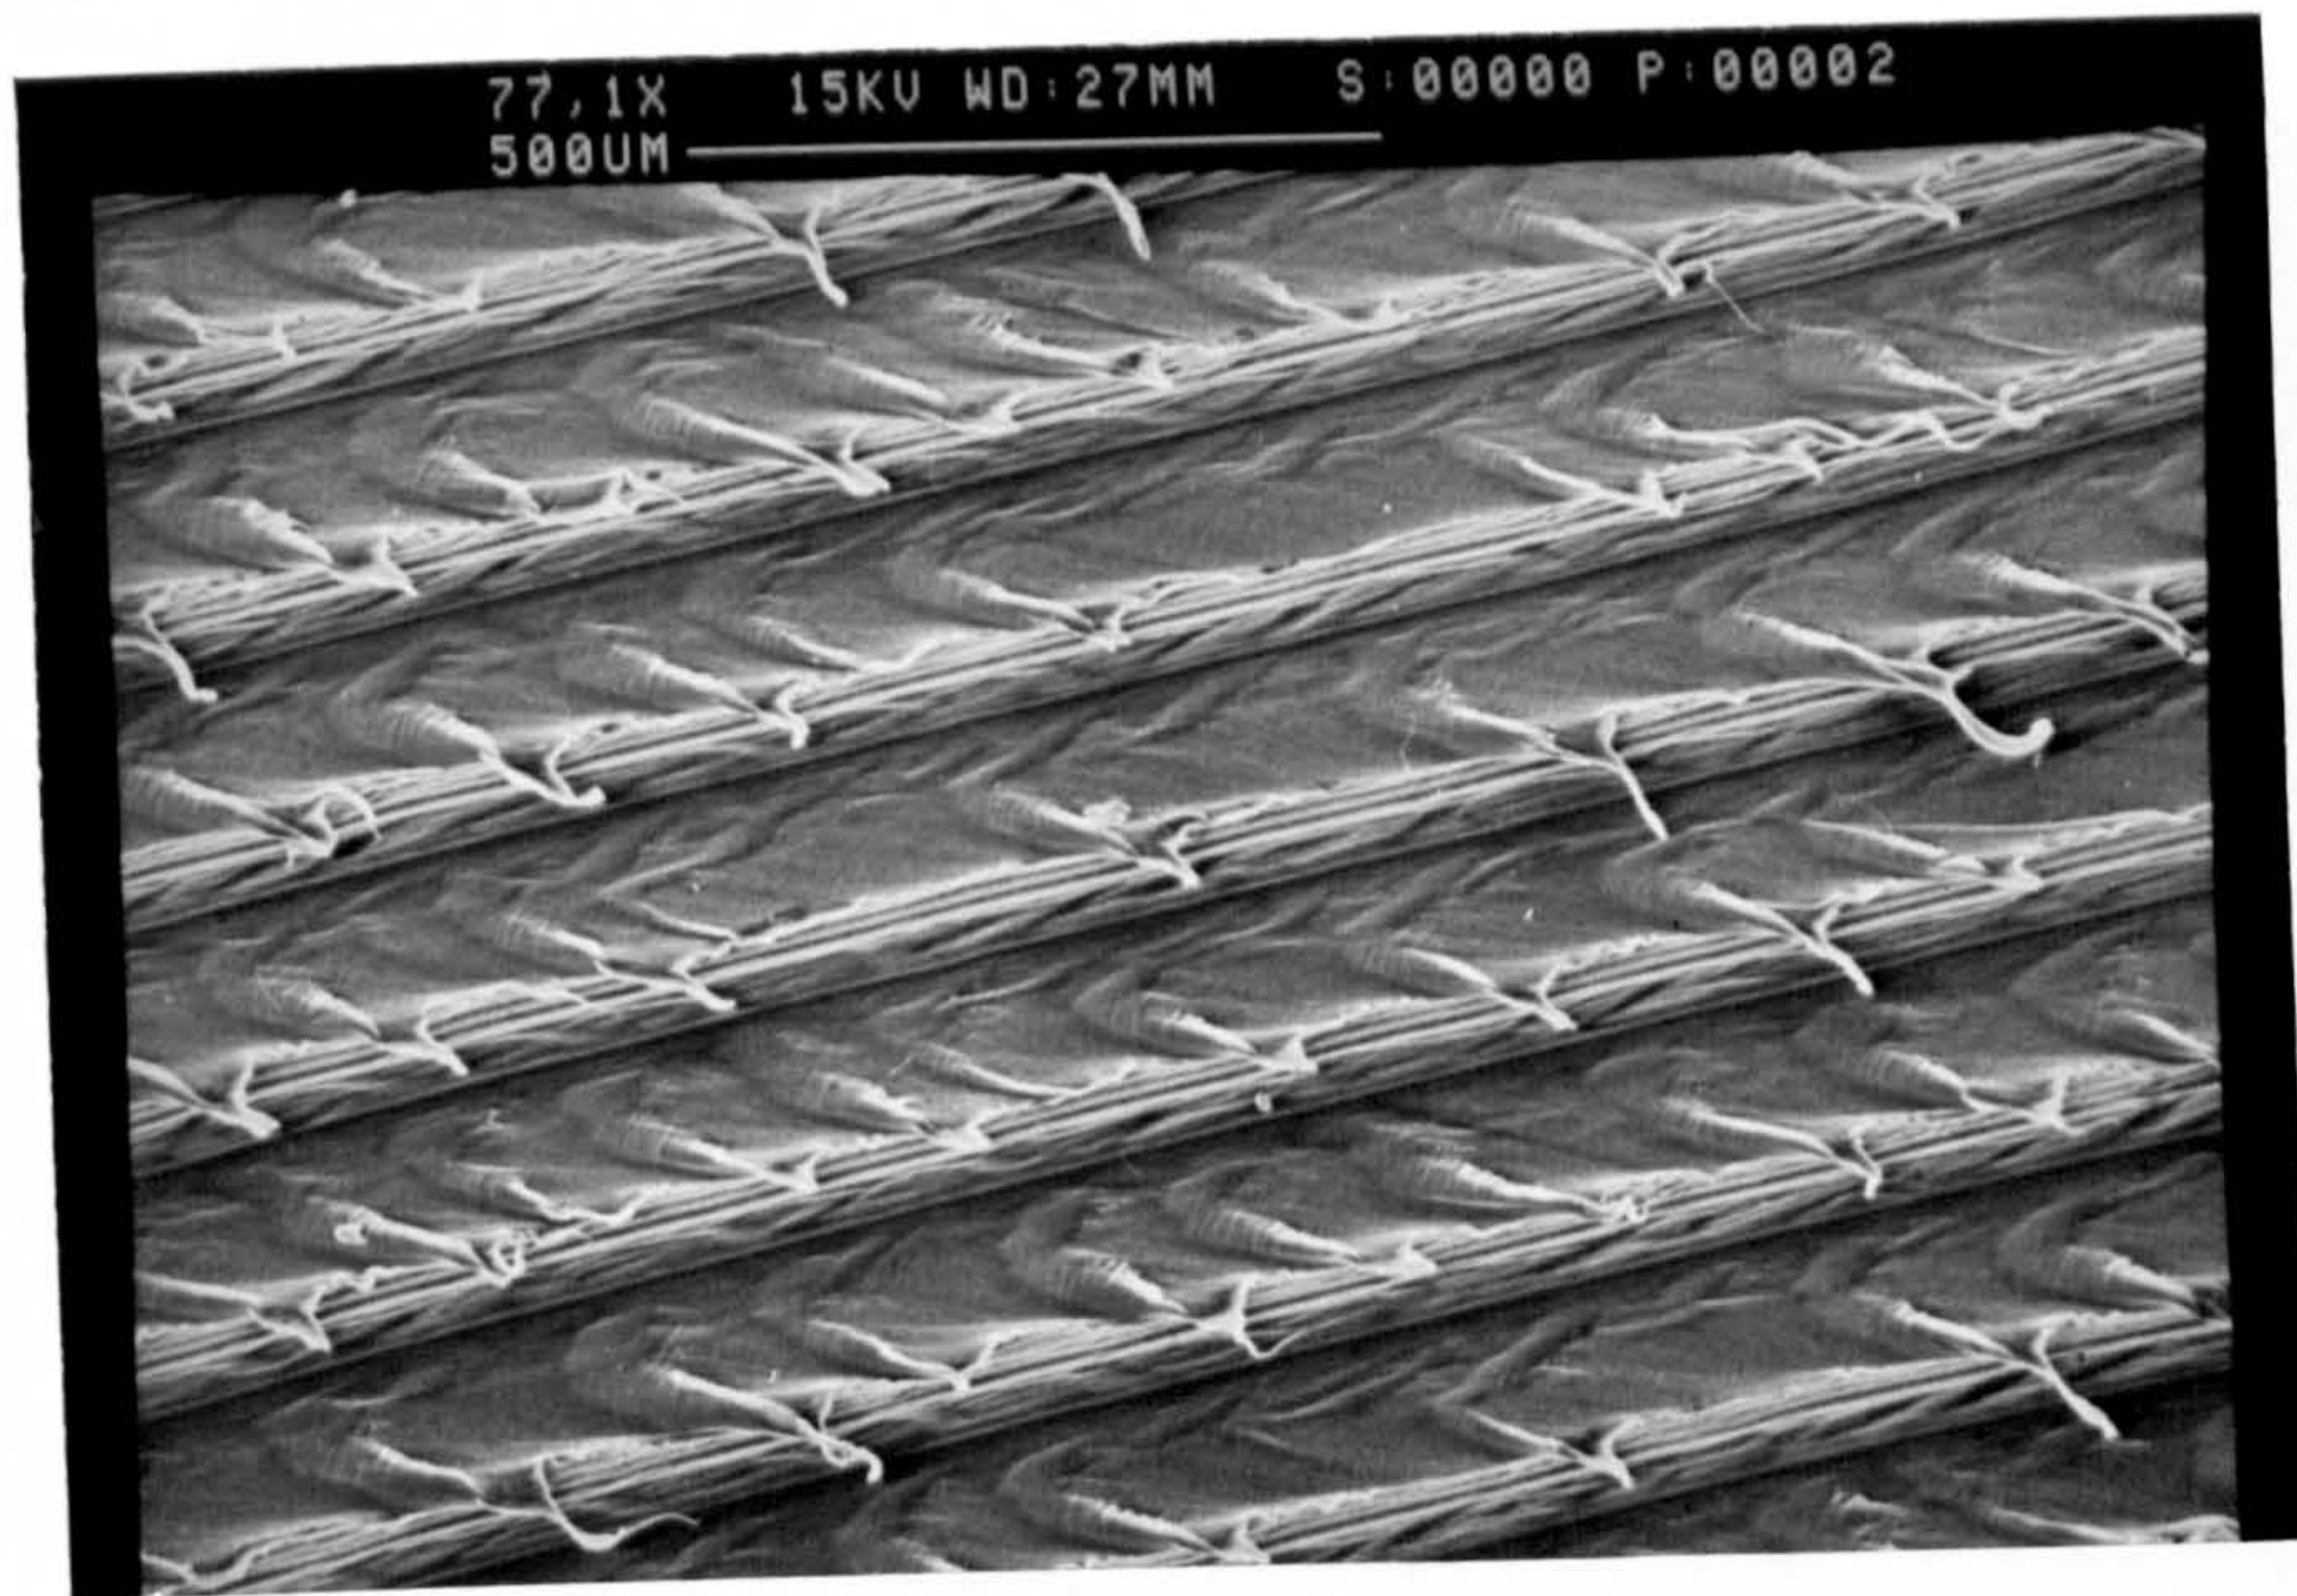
Machined HDPE surface showing the flow of viscous work material. (Rake angle =  $-20^{\circ}$ , speed = 25 m/min, feed = 0.16 mm/rev)
